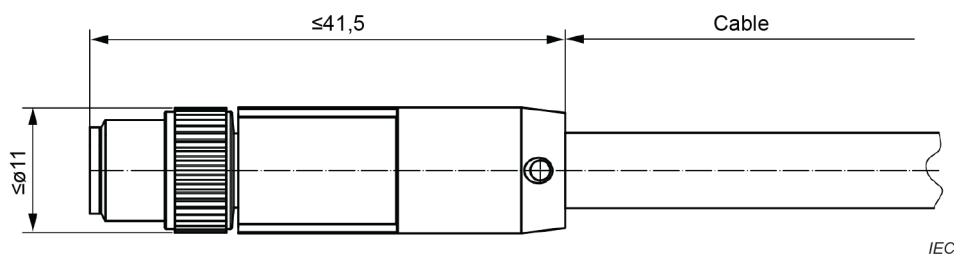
Non-rewireable connector, male contacts, straight version, with locking nut
